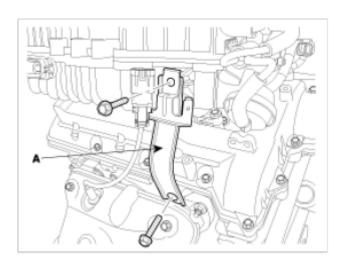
Identifying Surge Tank Stay With Mounting Bolts
